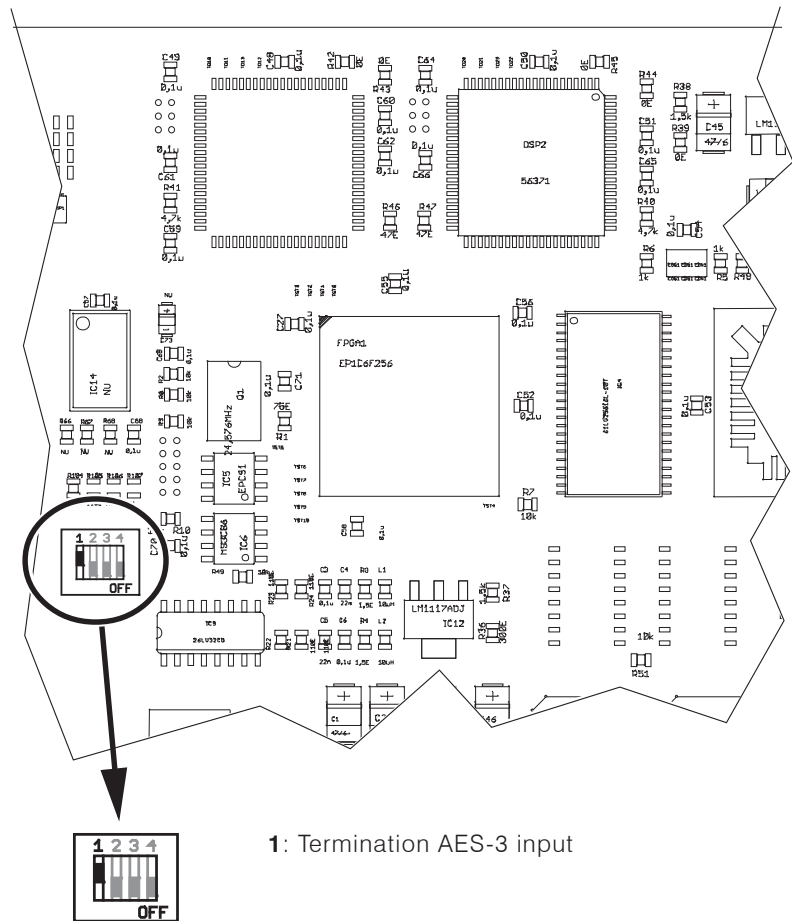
Partial view of the main pcb with the DIP switch
